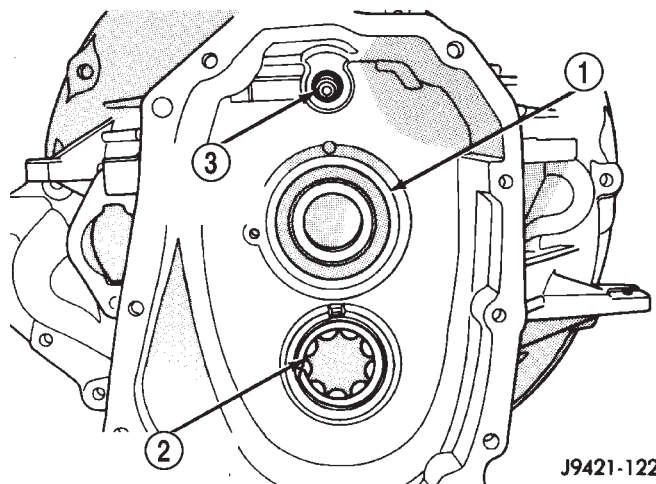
Input Shaft Bearing And Countershaft Front Bearing Installation
